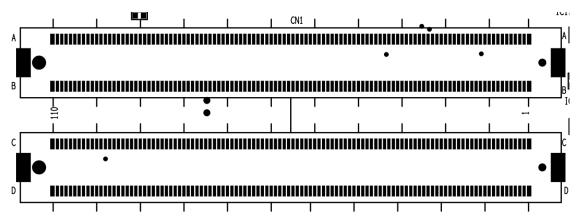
BOARD TO BOARD CONNECTOR COM EXPRESS
